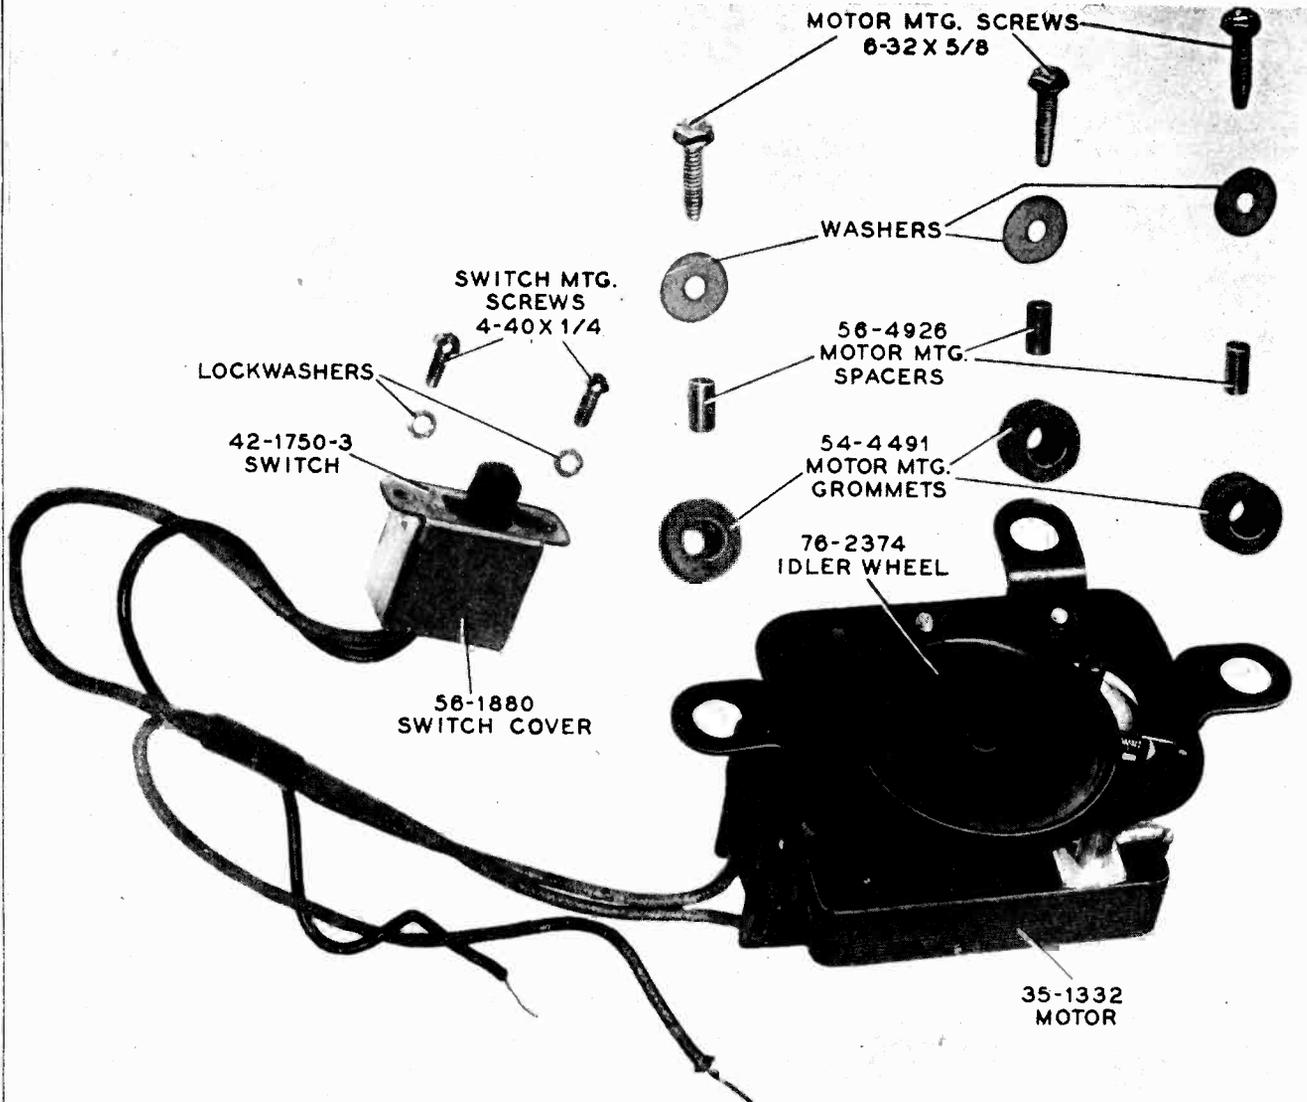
MOTOR, SWITCH, AND MOUNTING HARDWARE
